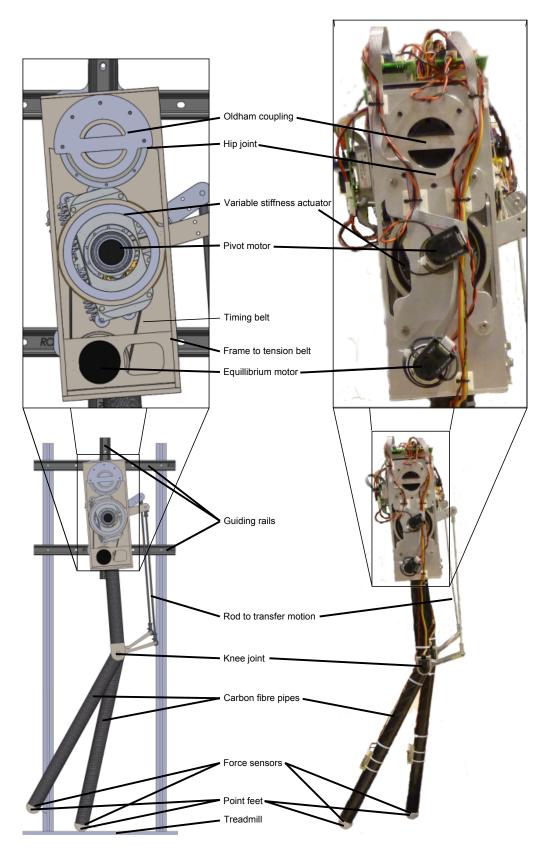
Mechanical design of the biped walker—On the left a CAD drawing is shown, and on the right a photograph of the realized robot.
